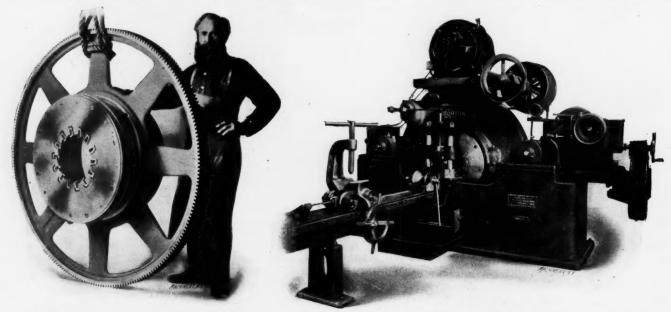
Main Driving Gear of the Gorton Cutting-off Machine Fig. 2. Heavy-duty Cutting-off Machine, built by the George Gorton Machine Co.
